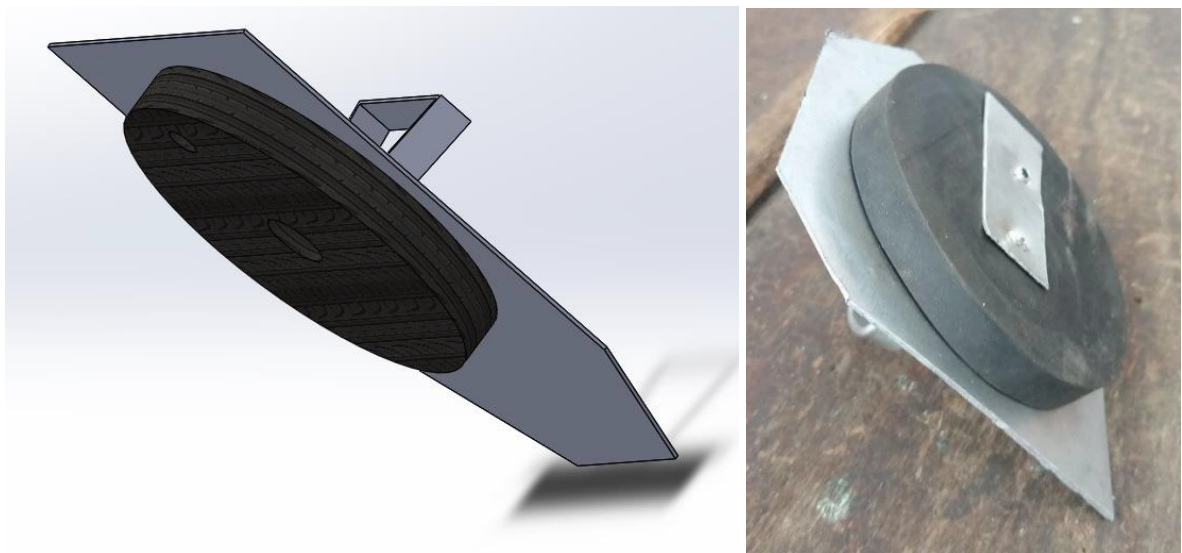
Oven door SOLIDWORKS and manufactured prototype
